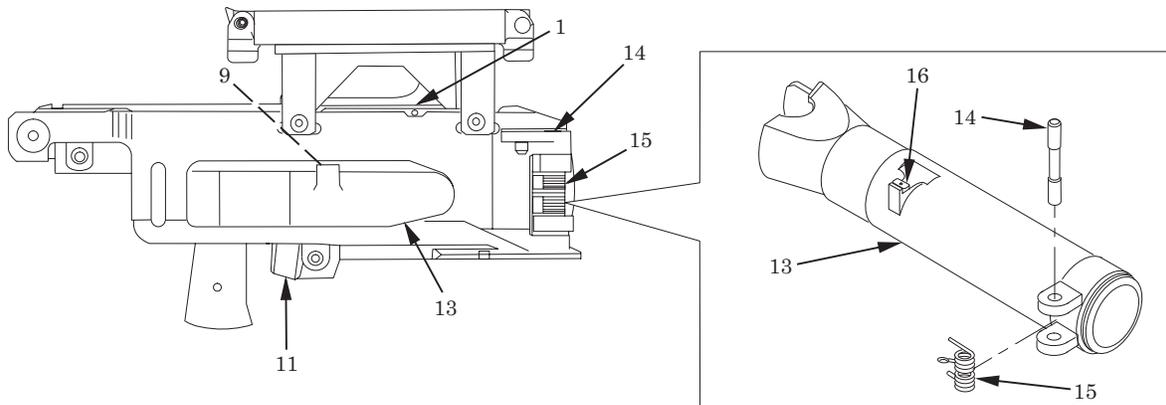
Assembly of Barrel Assembly to Receiver Assembly.
